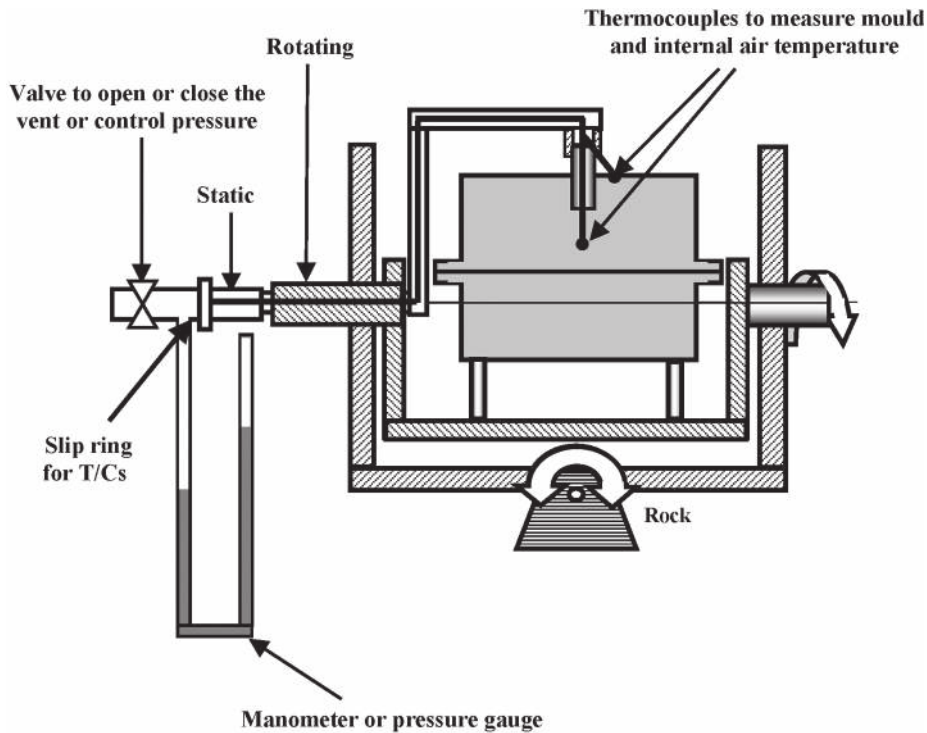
Pressure and temperature monitoring system on a rock-and-roll machine (T/Cs, thermocouples)
